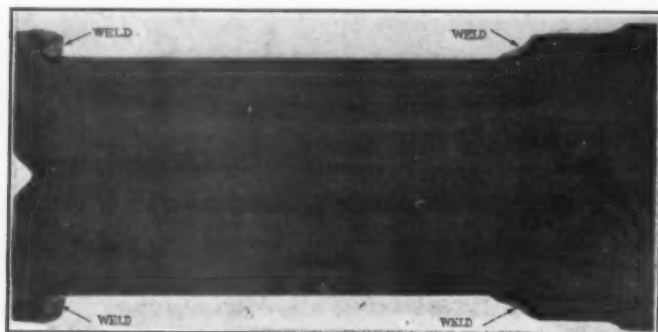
Longitudinal Section Through a Car Journal Welded By the Electric Method
